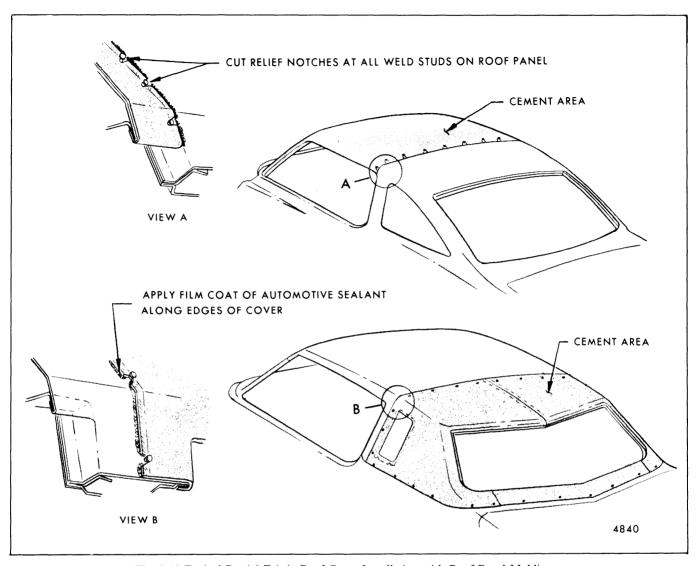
Typical Partial Fabric Roof Cover Installation with Roof Panel Moldings
